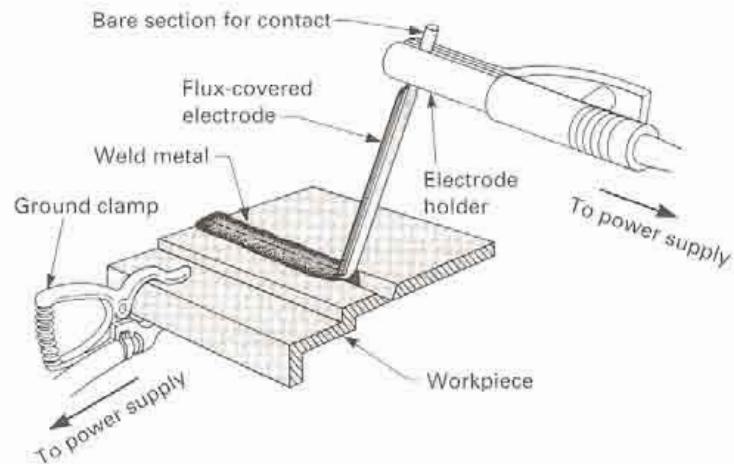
A shielded metal arc welding (SMAW) system.
